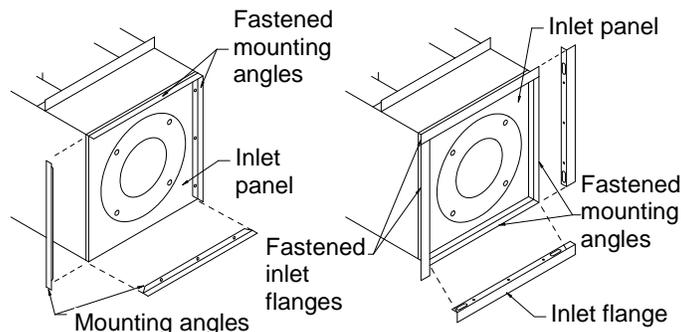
Mounting inlet flanges for sizes 13 and 18 only.
